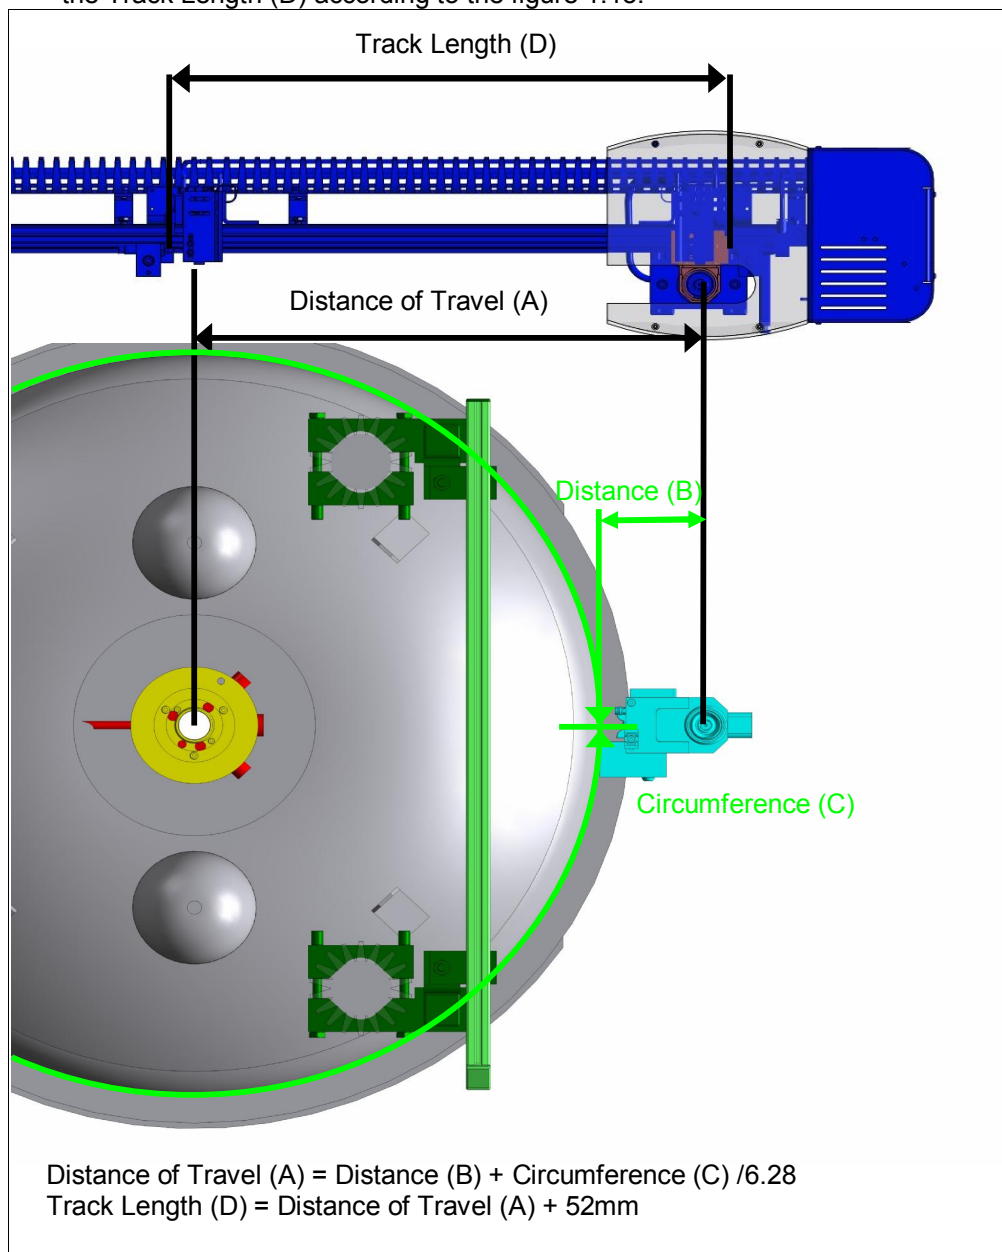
Preparing the LINEAR AXIS UNIT (Measures on MAGNET and LINEAR AXIS UNIT)
